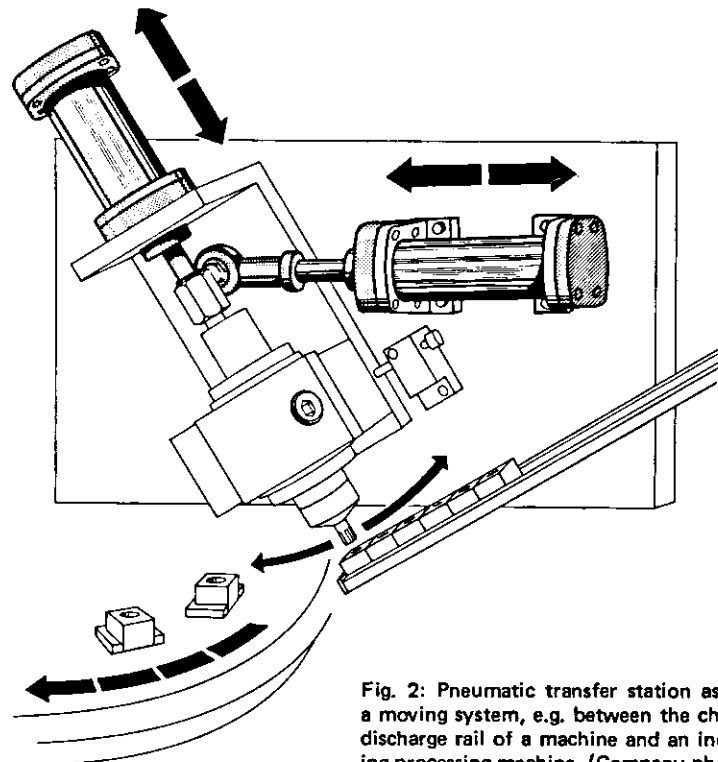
Pneumatic transfer station as the link between a rigid and a moving system, e.g. between the chute of a vibratory conveyor or discharge rail of a machine and an indexed feed system of a following processing machine. (Company photo: Blosch/FESTO)
